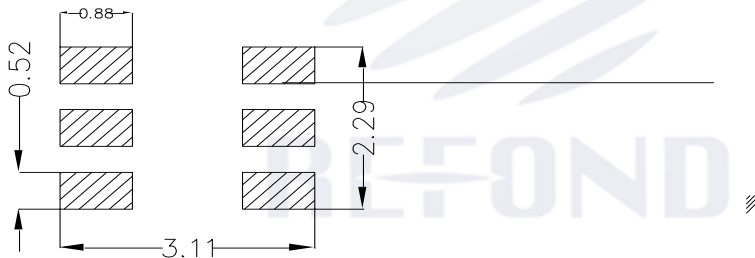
Soldering patterns 推荐焊盘
